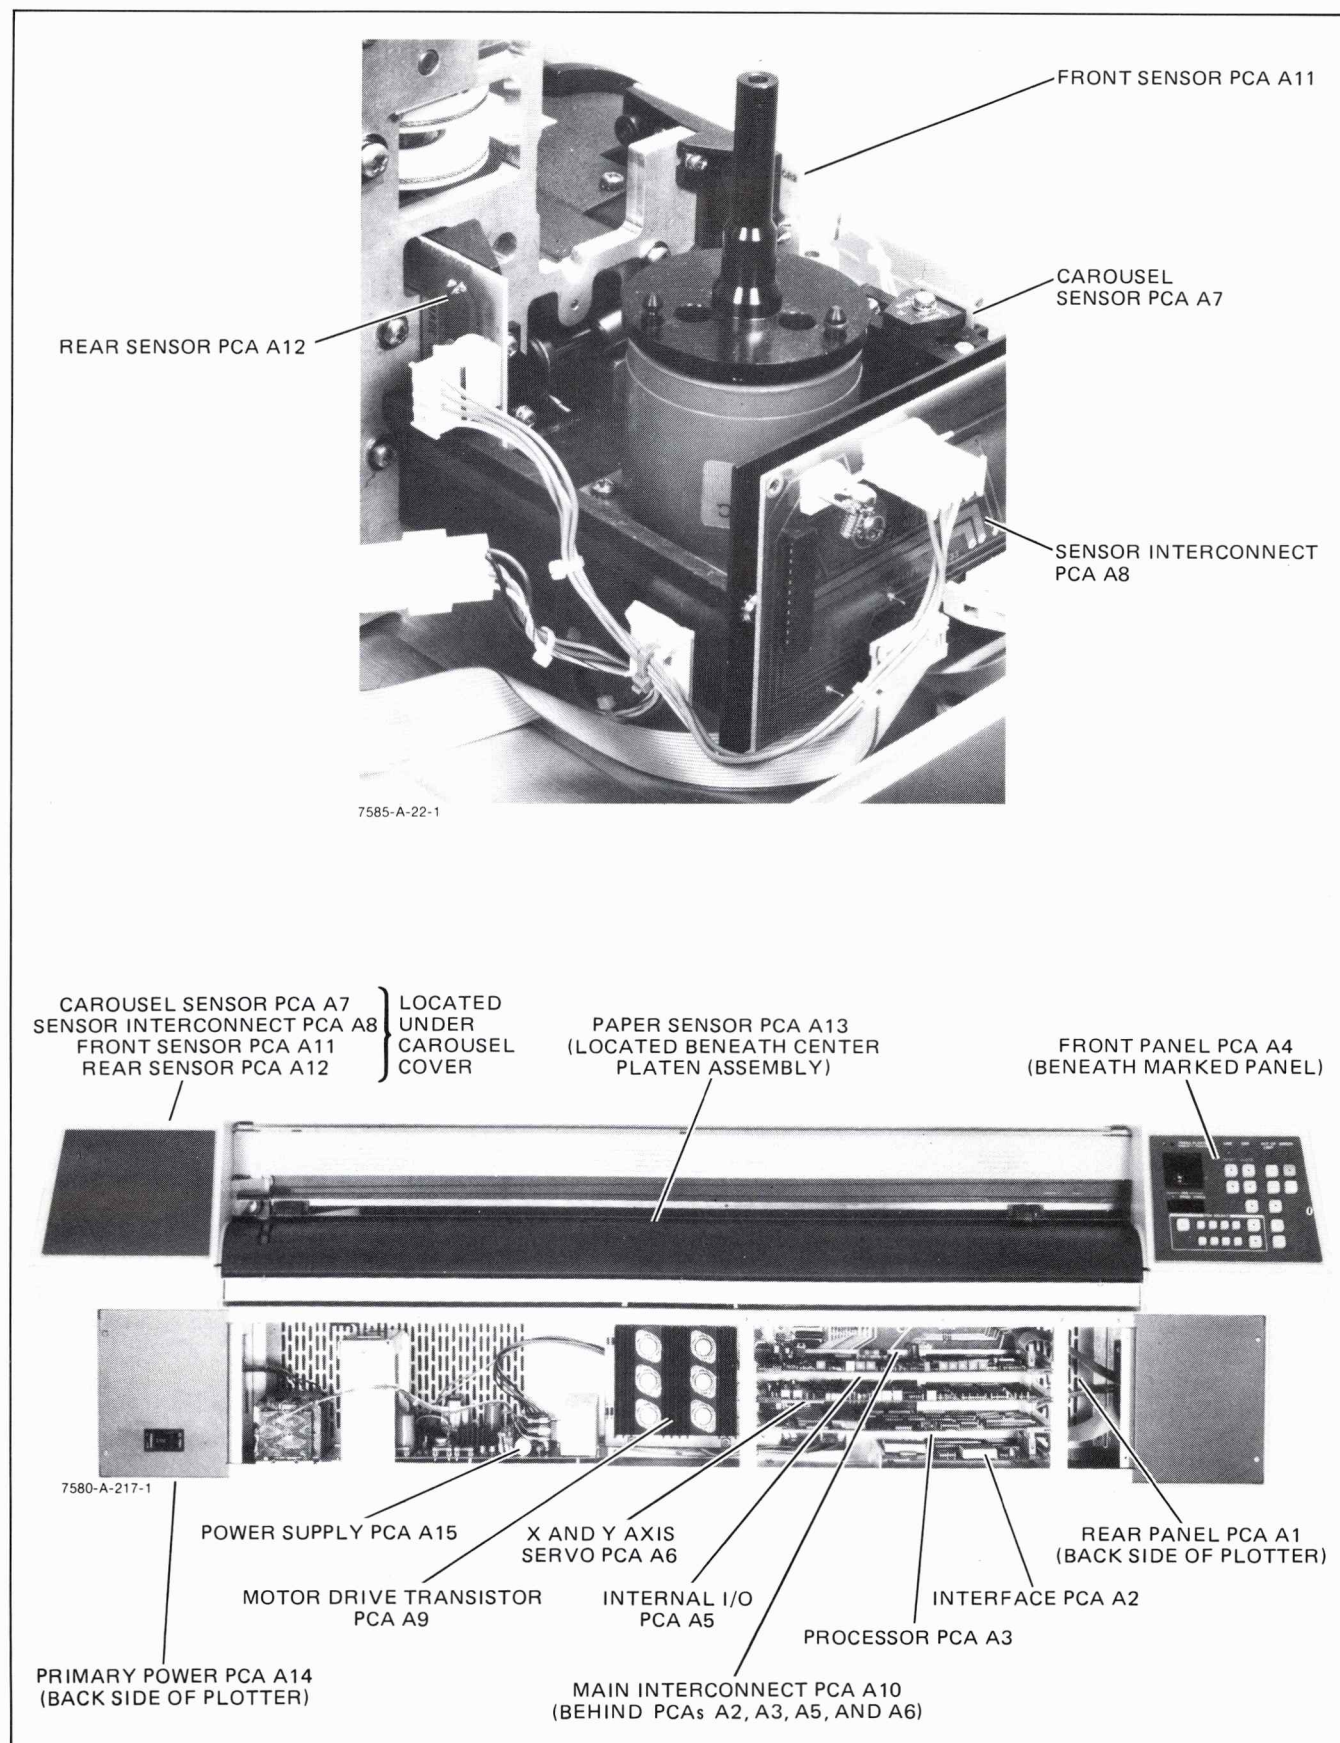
Printed Circuit Assembly (PCA) Identification
